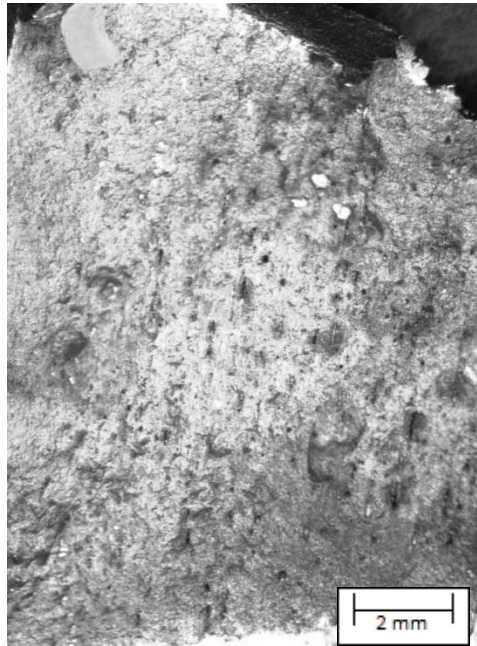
Stereoscopic image of the ductile fracture surface of sample 2 (Heat treated for 579h at 635°C prior to welding and a 12h PWHT at 635°C)
